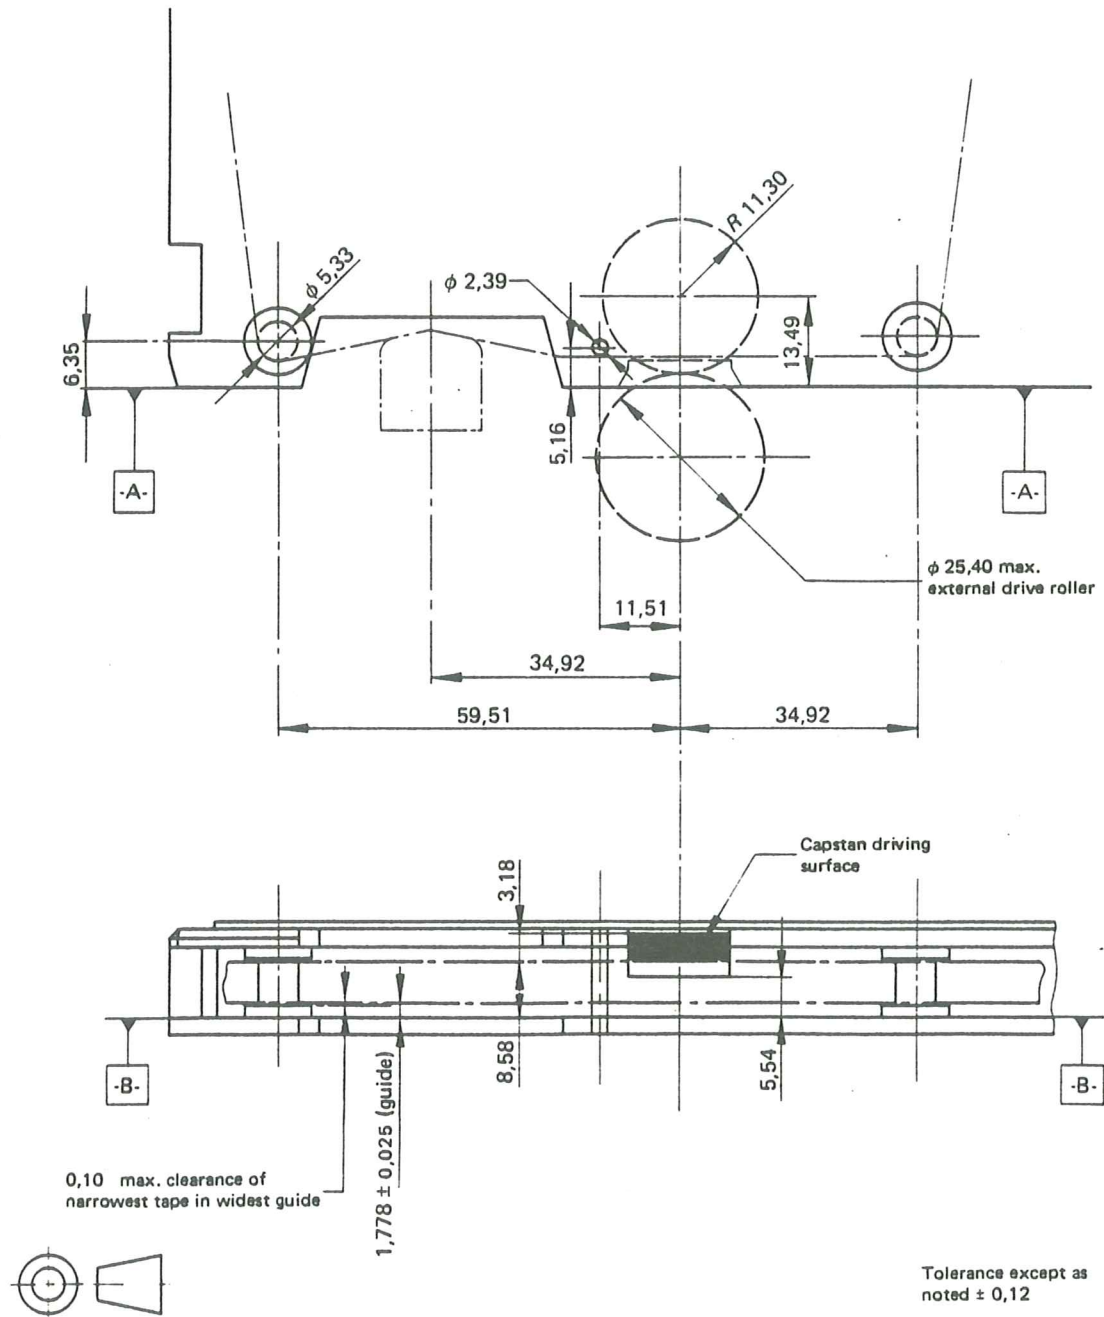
TAPE PATH AND DRIVE DIMENSIONS
